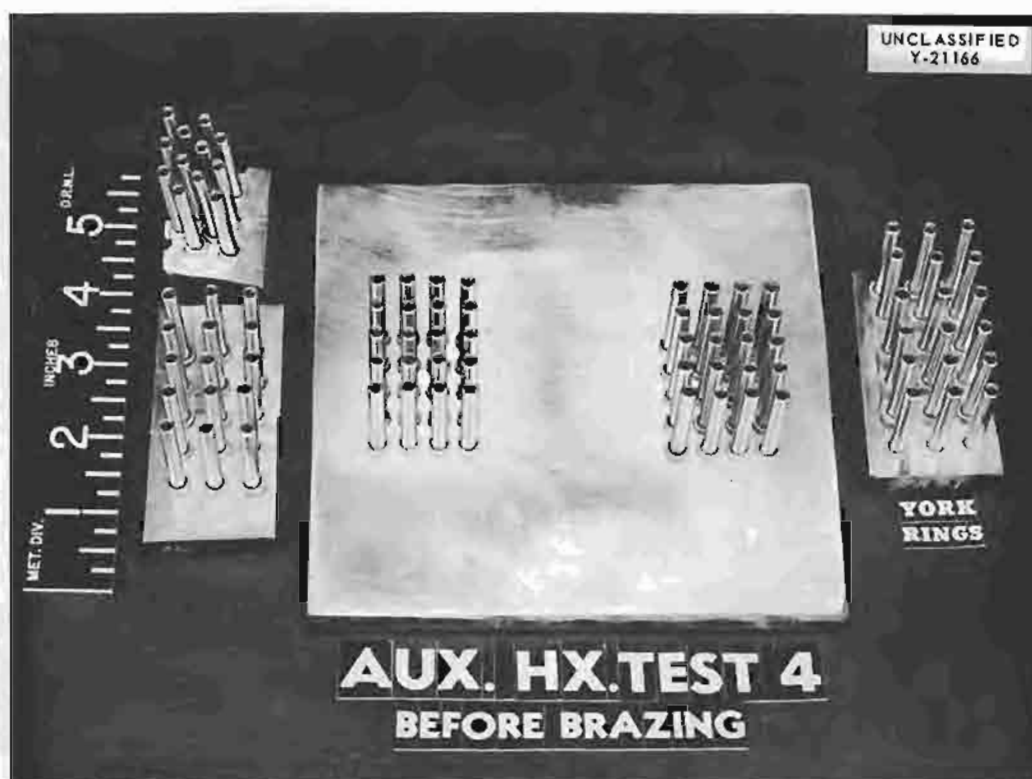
Tube-to-Header Test Assembly Before Brazing.
